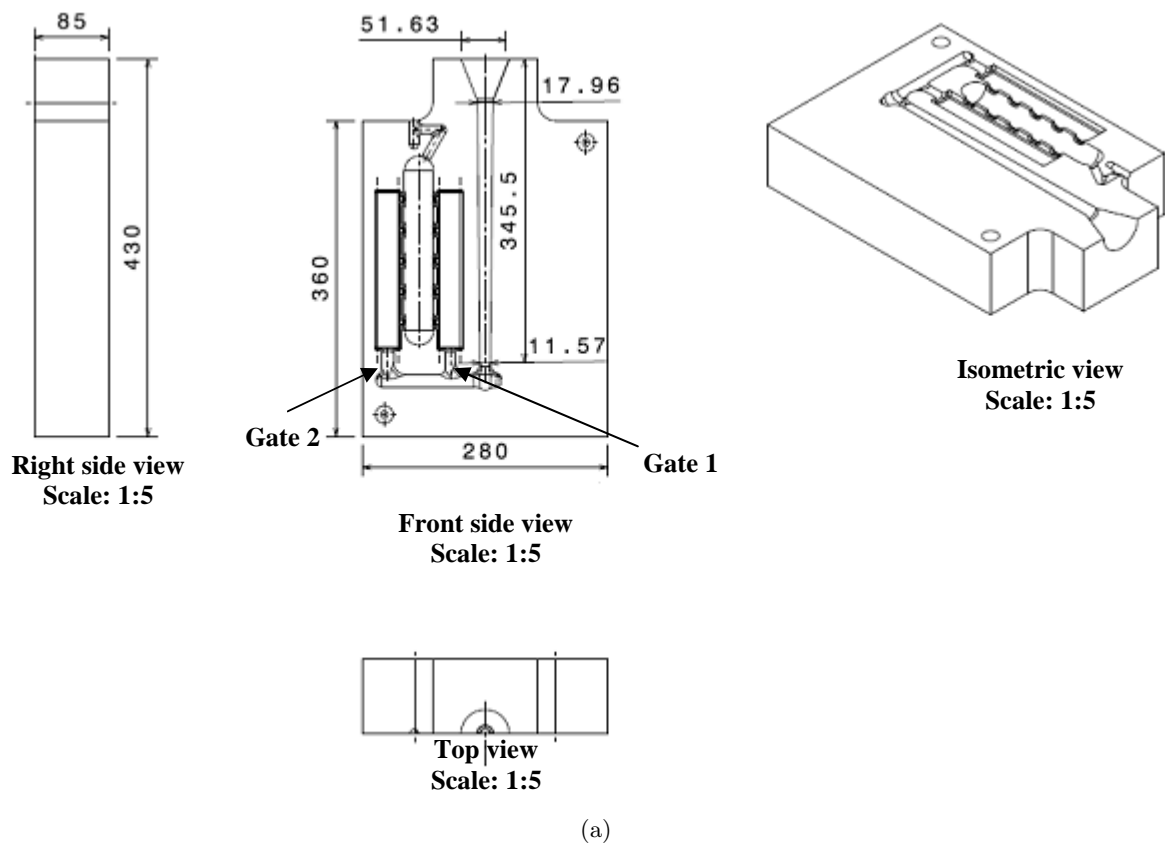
All dimensions are in (mm)(a) Permanent mould design and (b) Casting design.
